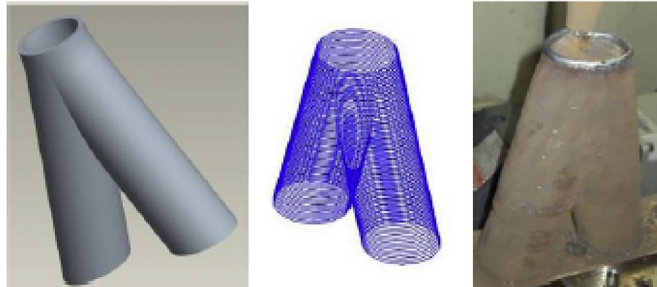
CAD model and Deposited part (212 mm height, 60 mm diameter with 129 layers) [61]
